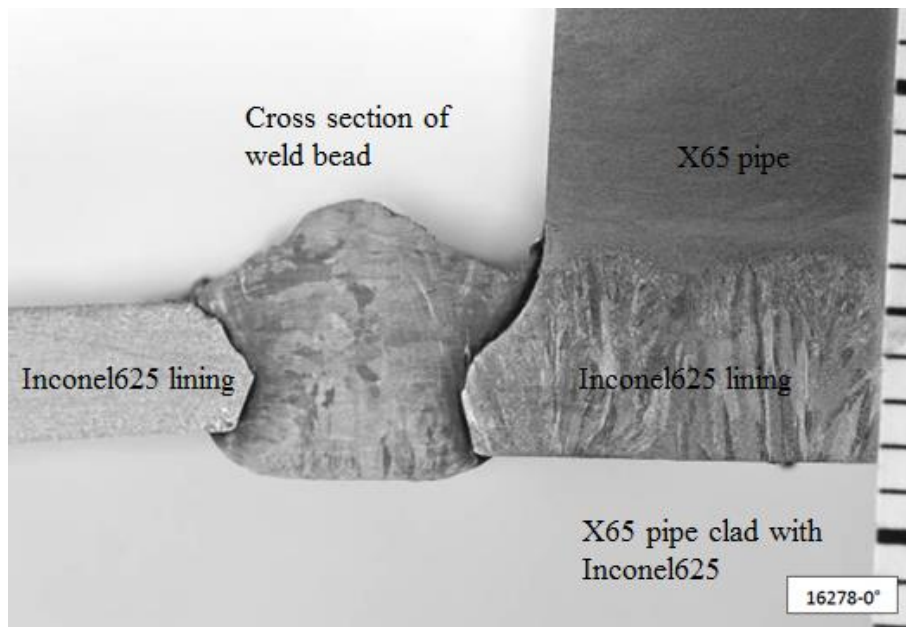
The cross section of the weld bead during welding Inconel625 lining in the root pass. This picture is provided by Allseas Engineering B.V..
